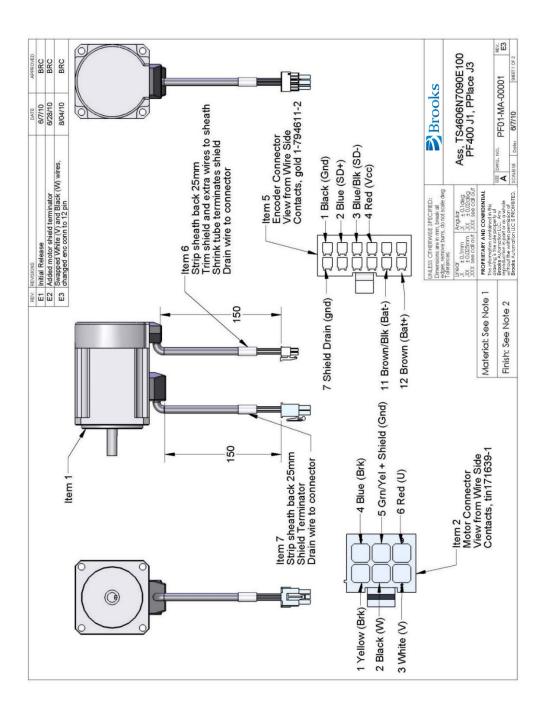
Assembly, TS4606N7090E 100, PF400 J1, PPlace J3
